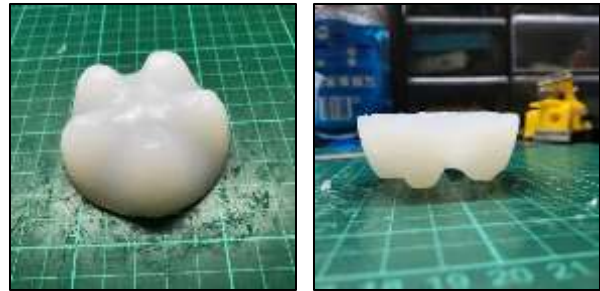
Mountain Dew Silicone Mold (a) base part bottom view, (b) side view
